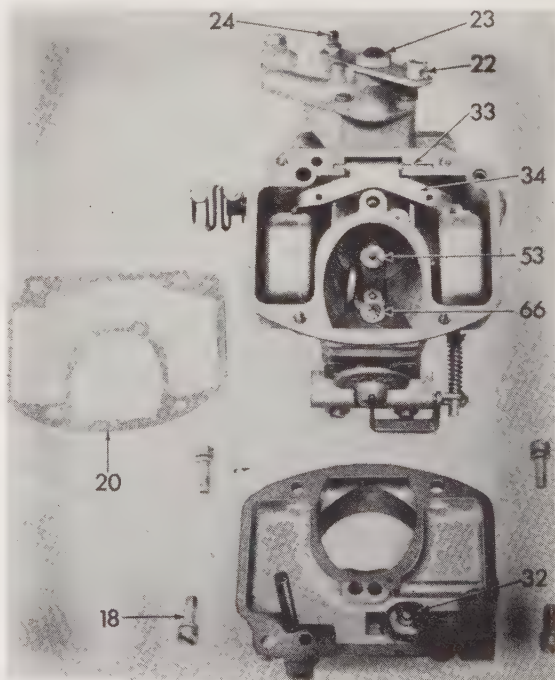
12 Solex type B32 P1 H carburettor with top cover removed. (For part numbers refer to Fig 2:7.)
